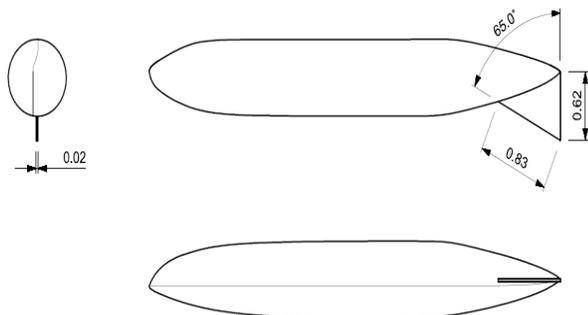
External Tank with Delta Fin Drawing (Dimensions in meters)
